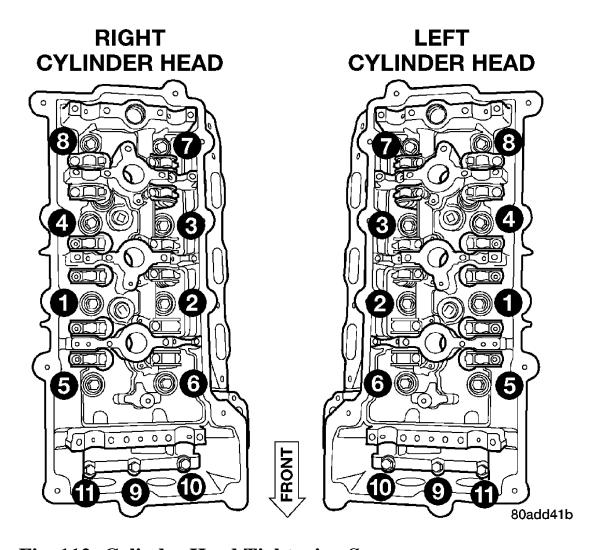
Cylinder Head Tightening Sequence Courtesy of CHRYSLER LLC
